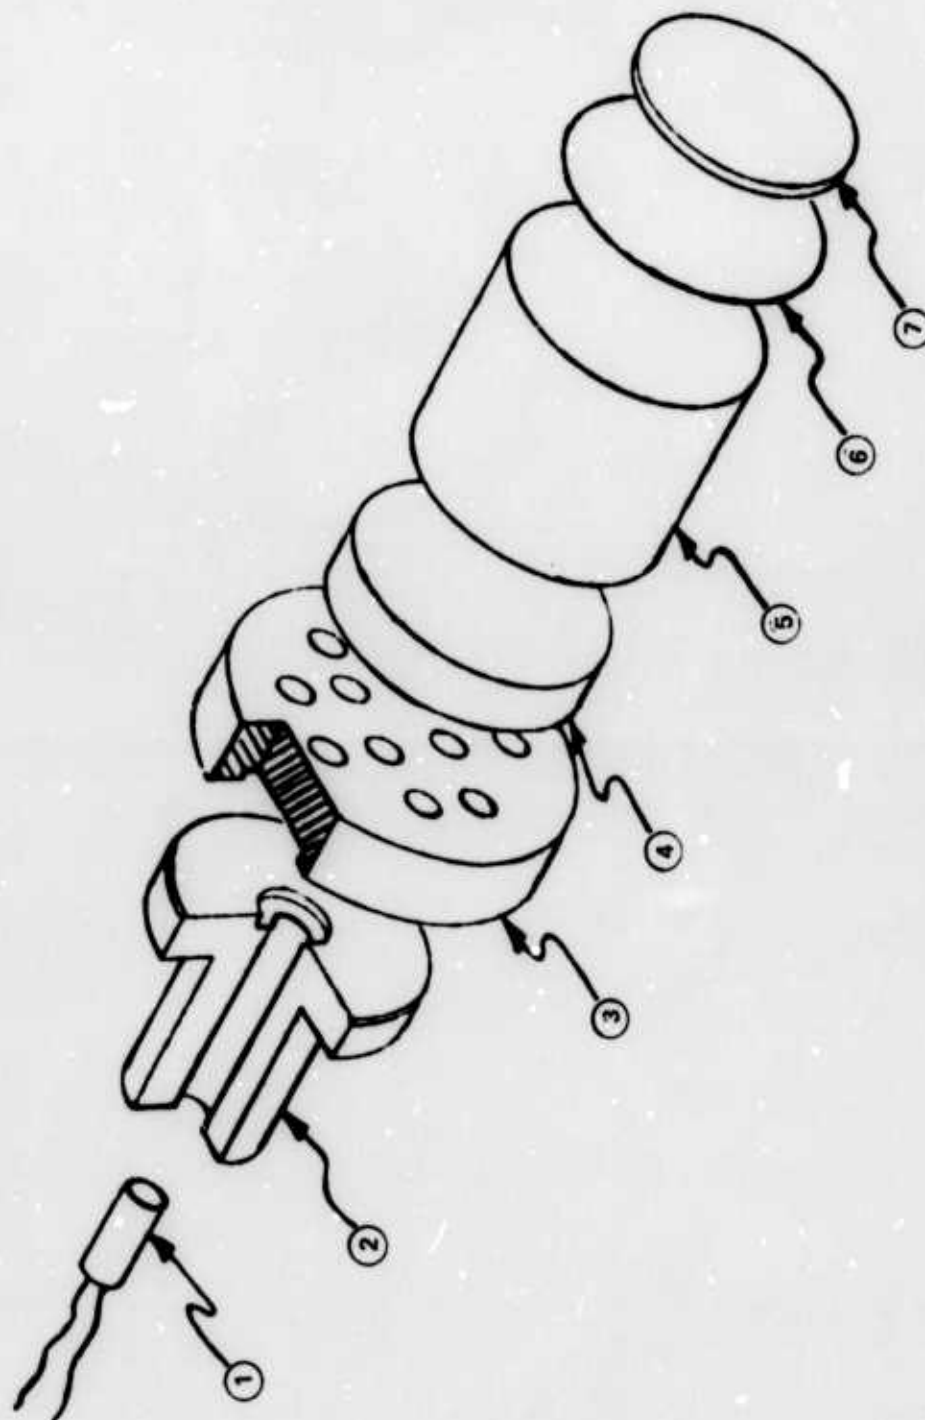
CALSPAN FLYER PLATE LAUNCH ASSEMBLY
